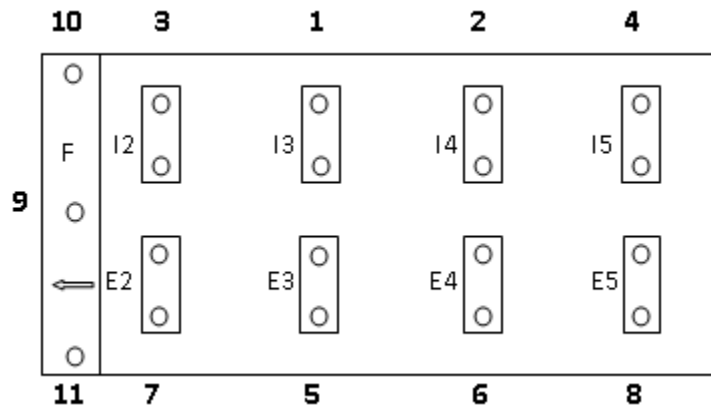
Camshaft Bearing Cap Installation and Torque Sequence
